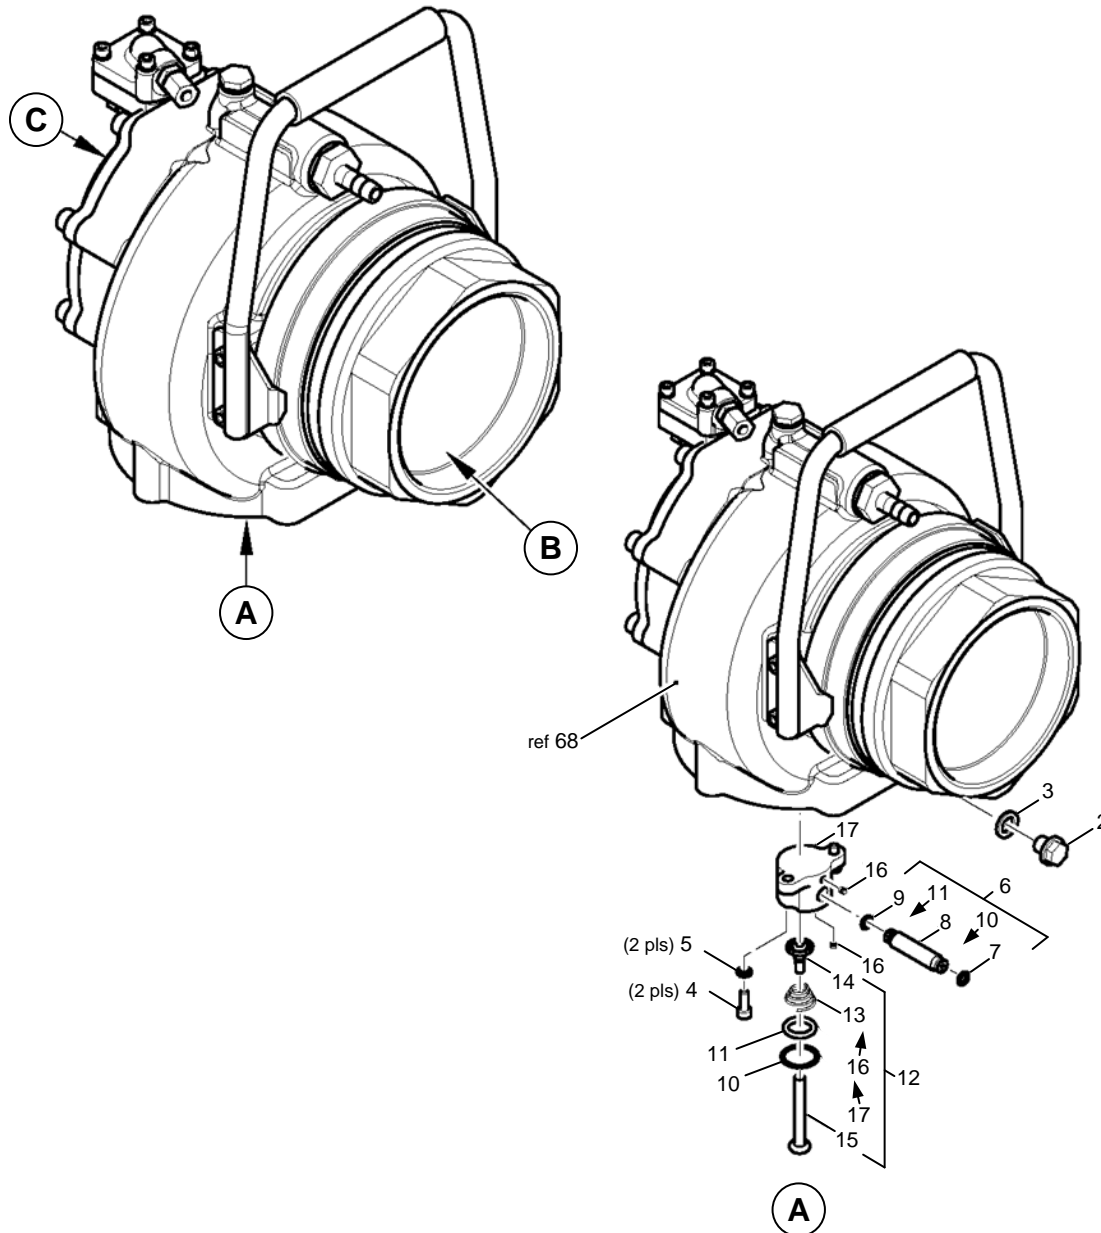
Valve Assembly, Pressure Control, 4 Inch Intake
